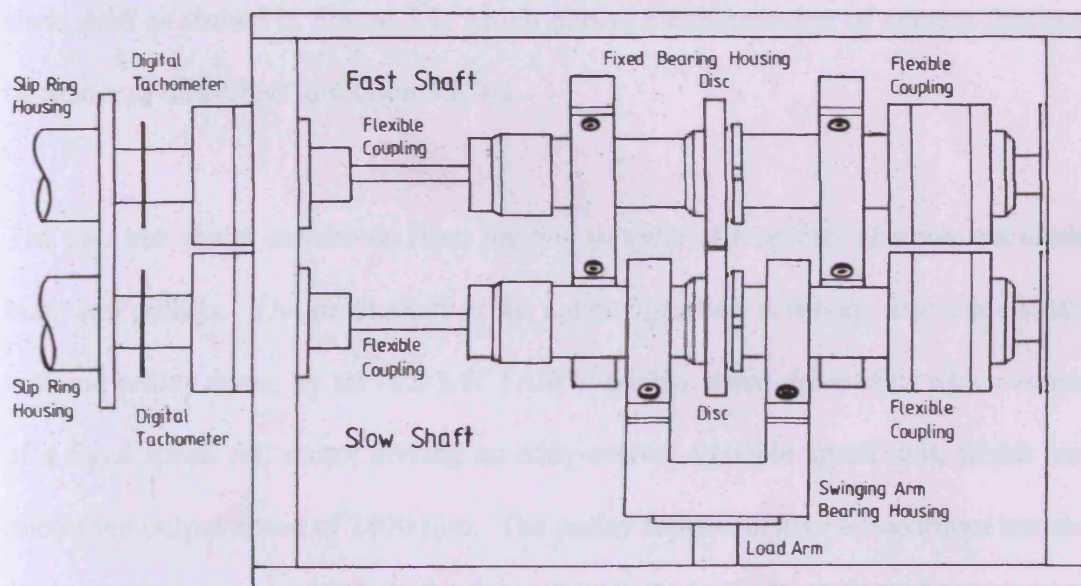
Section and plan drawing of the test head and drive arrangement of the test rig (from Patching, 1994)
